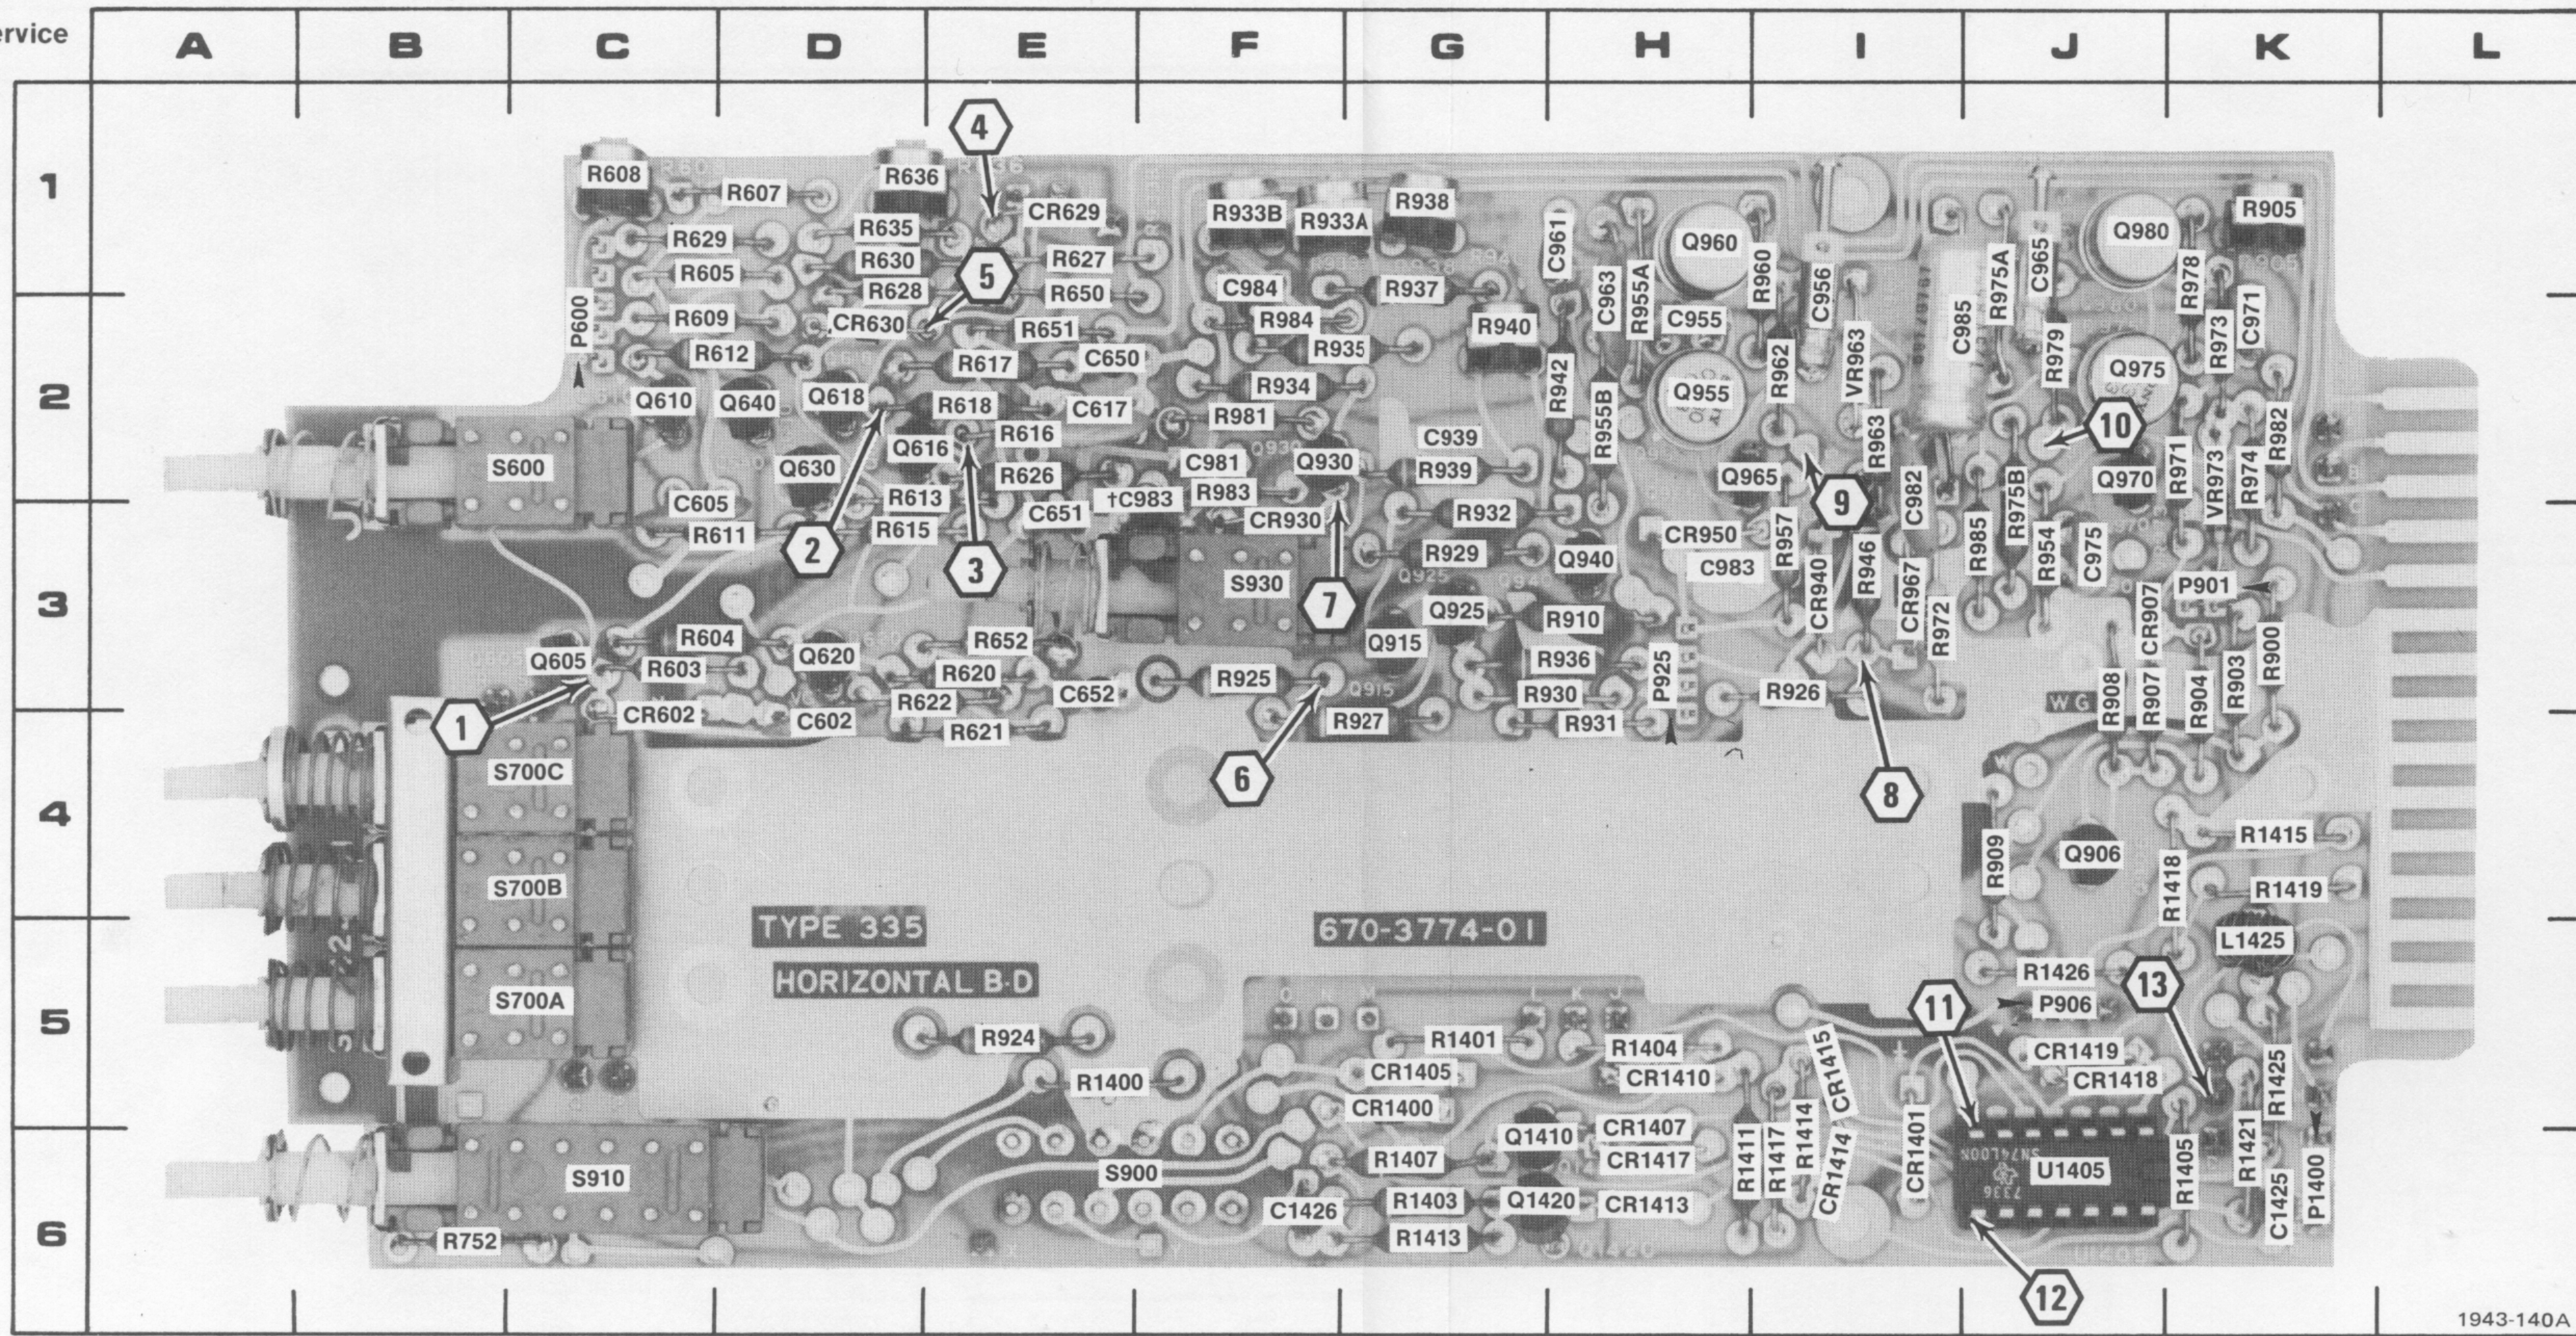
A4 Horizontal board component locations, below SN 300121.
